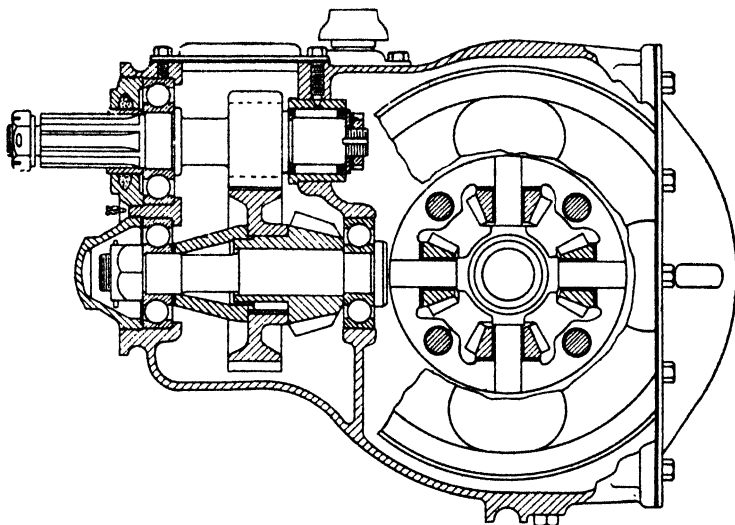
DOUBLE-REDUCTION GEAR WITH FIRST REDUCTION BY SPUR GEARS.
